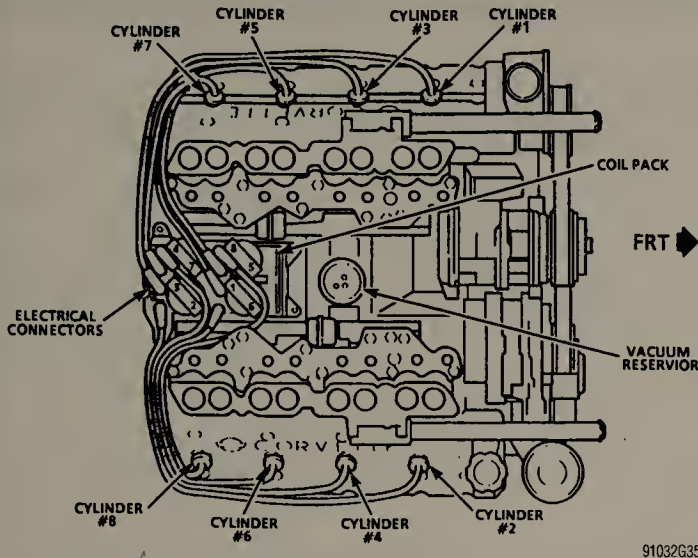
Location of the ignition coil pack, and cylinder identification—5.7L (VIN J) engine
